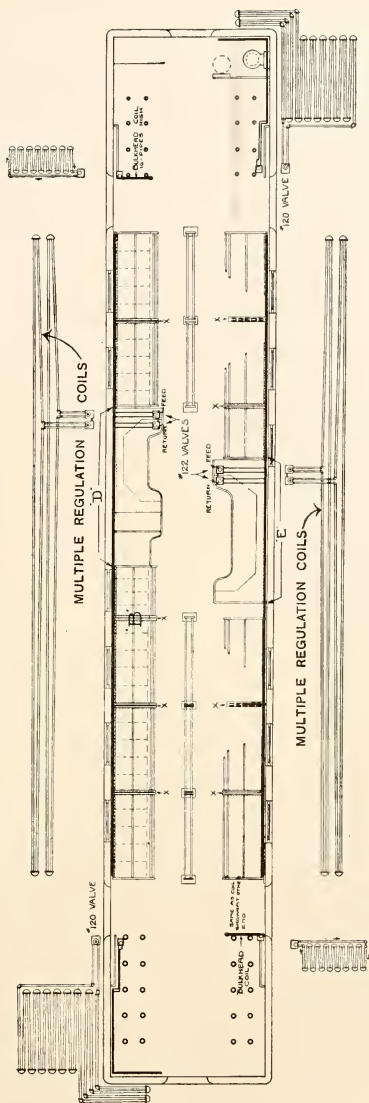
Arrangement of heating coils and cut-out valves in a Postal car.
